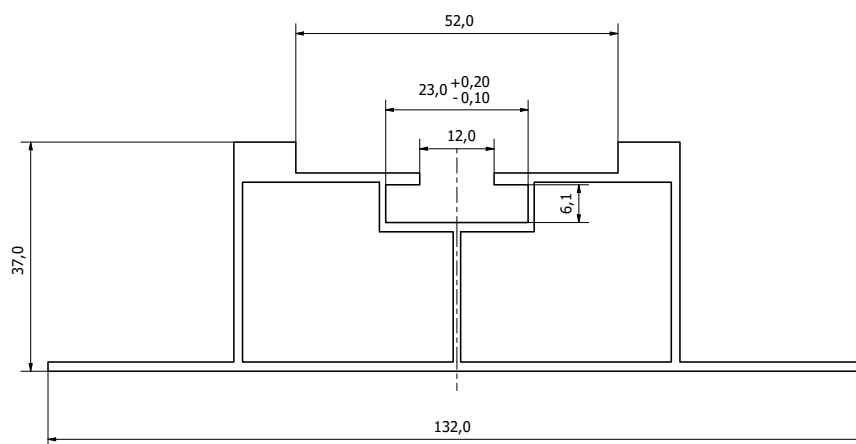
K-45-1200 / K-45-2400 aluminum rail
